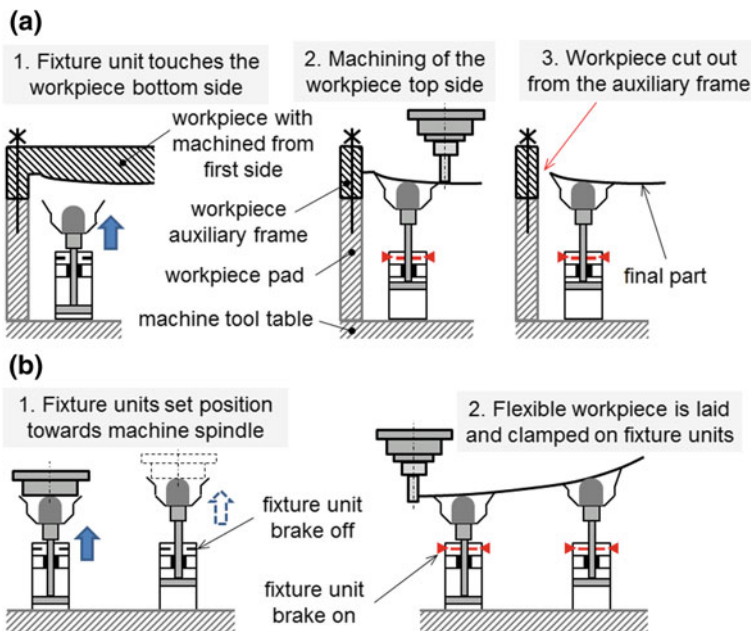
Strategies for position setting of the support point and workpiece clamping: (a) clamping of the rigid raw part; (b) clamping of the flexible raw part
